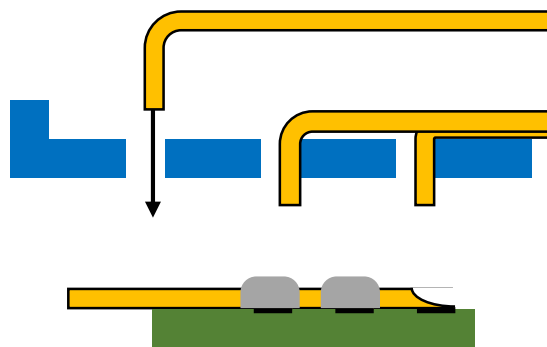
Diagram of Microwire Threading and Thermal Mechanical Bond Processes. Wire ends are threaded into through-holes in the PMMA molds. The opposite wire end is connected to PCB via thermal mechanical bond with a gold plated PCB pad. Successful bonds are coated with epoxy as stress relief.
